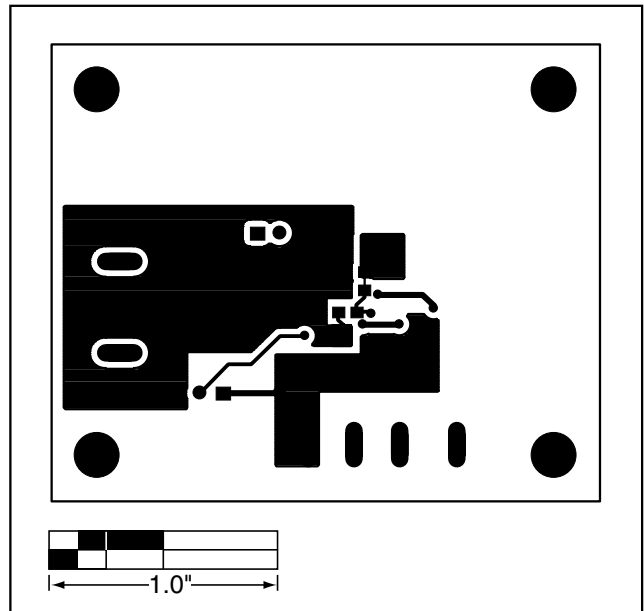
MAX1791 EV Kit PC Board Layout—Solder Side
